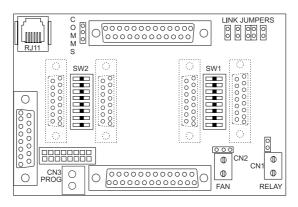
Layout Of Backplane PCB 220-01409-03
